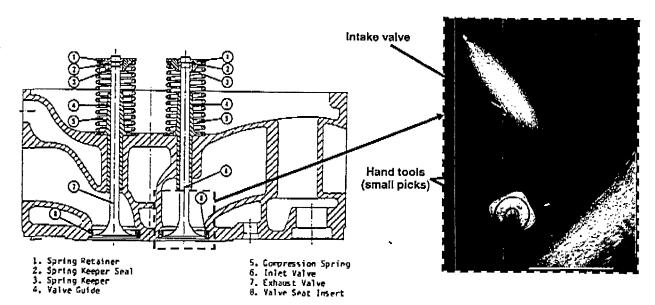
KSV CYLINDER HEAD CROSS SECTION
